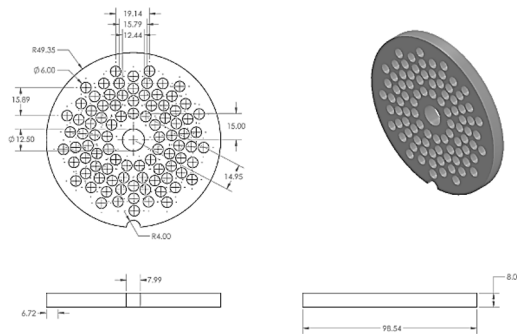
Design sketch of the pellet machine. (Source: Authors)
